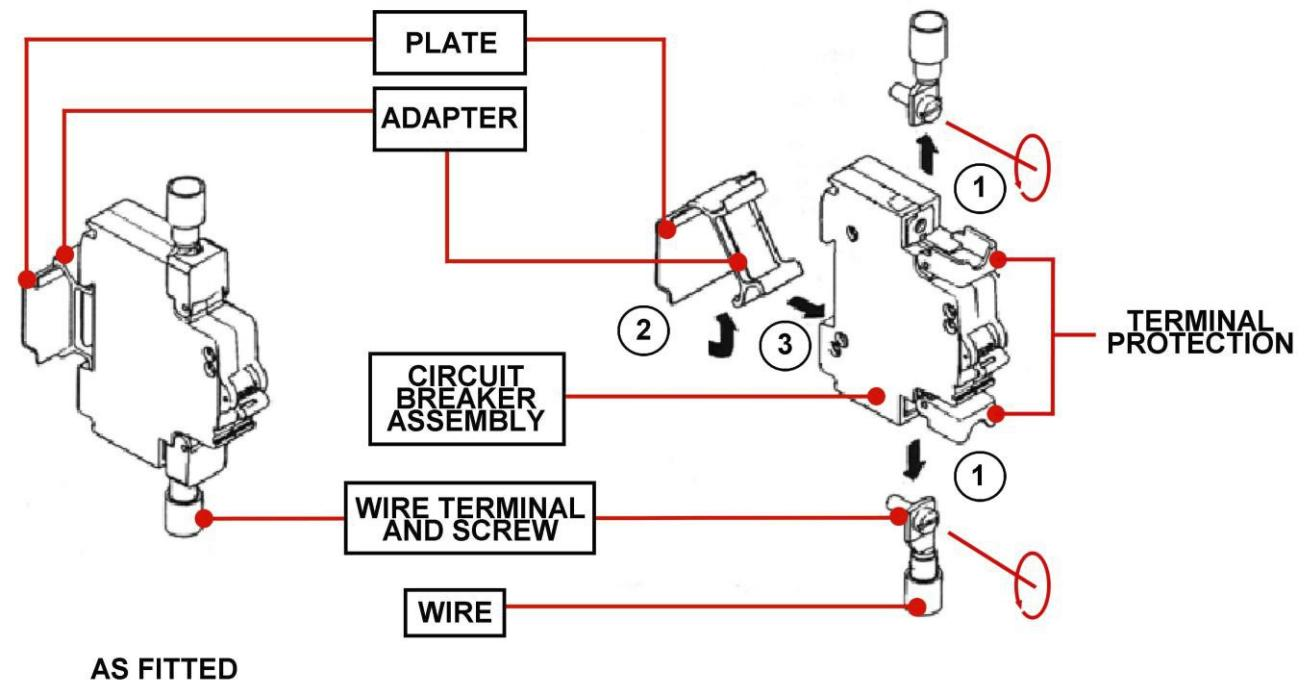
LV LOCKER -CIRCUIT BREAKER REMOVAL
